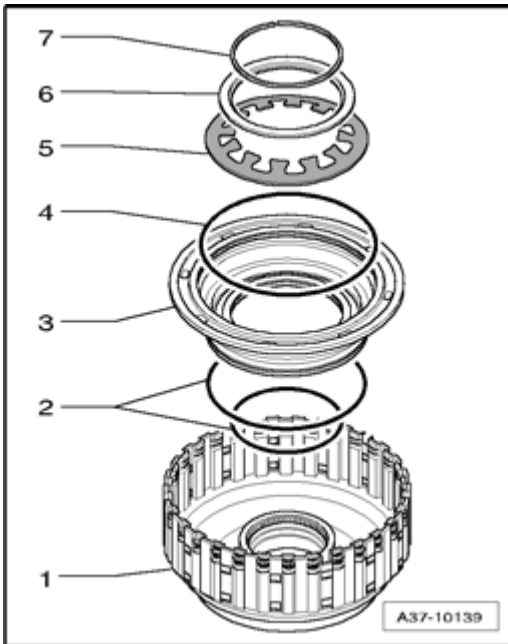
Cylinder "B", O-Rings For Piston "B", Gasket, Dished Washer And Retaining Ring
